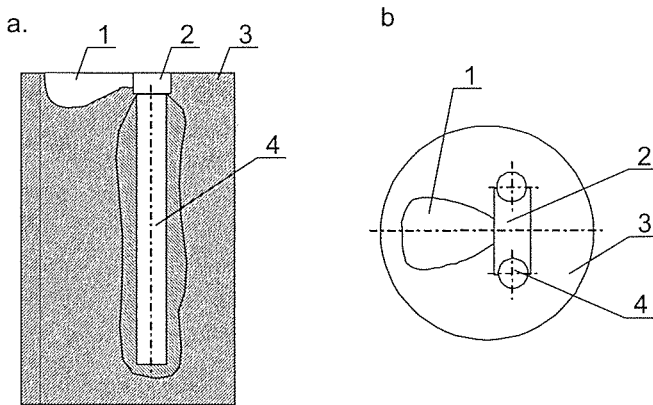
a. section, b. top view of the casting mold: 1 – reservoir, 2 – cross-gate, 3 – mold, 4 – sample for strength tensile test
